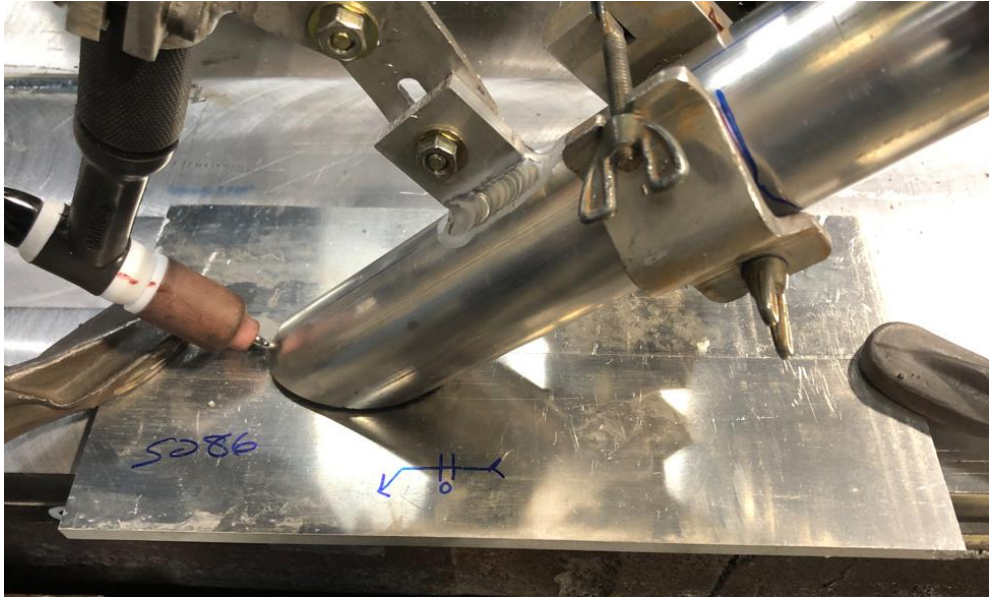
Plate and Torch Setup for a Back-Gouging Trial on 5086 Aluminum Plate
